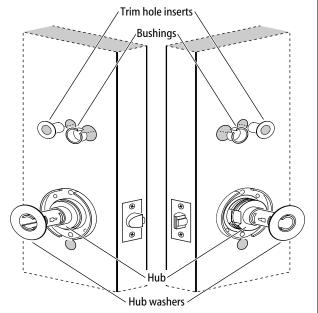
Installing the trim hole inserts, bushings, and hub washers
